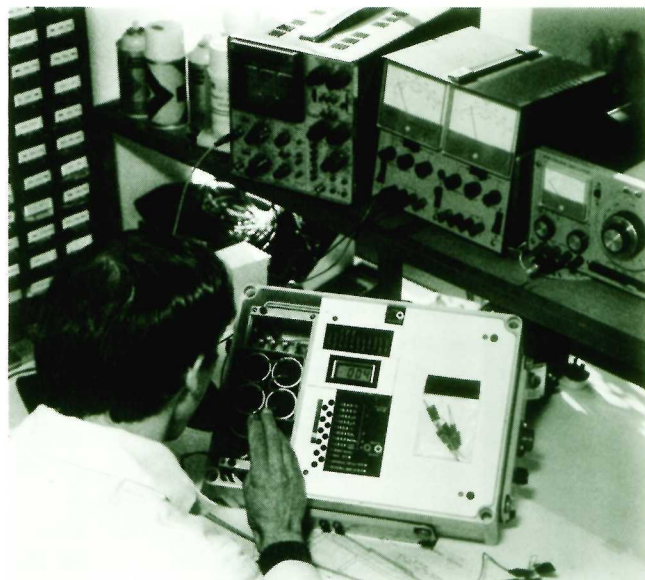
Assembly of electronic control equipment for photosynthesis measurements. (Photograph M R Smith)
